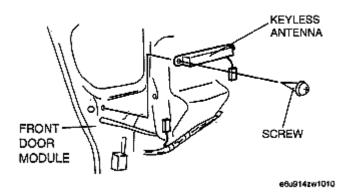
Identifying Keyless Antenna Remove/Install Components (Door) Courtesy of MAZDA MOTORS CORP.
